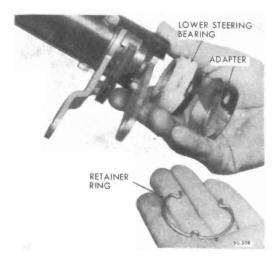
I32 - Installing Lower Steering Column Bearing - Manual Transmission
